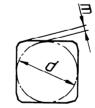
Case 3: Inserts with wiper edges (see note 1 of table 9)
